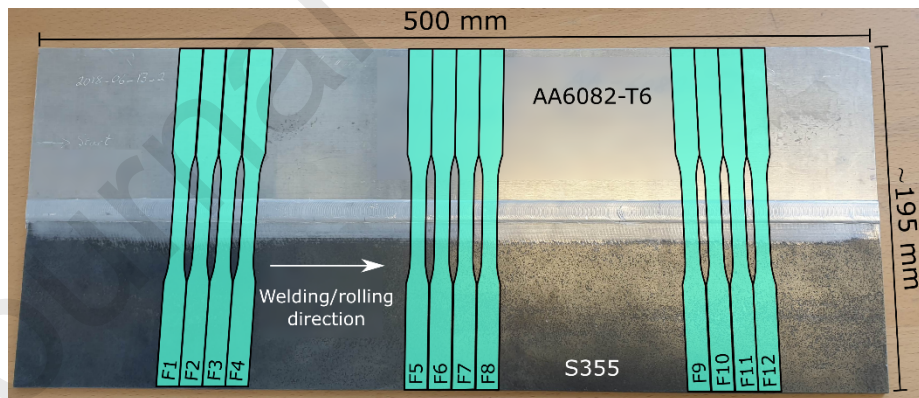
Overview of the entire third generation Al-steel HYB butt weld showing the approximate locations and correct labelling of the transverse specimens being used in the fatigue testing. The welding/base plate rolling directions and the total length/width of the butt-welded plates are also indicated in the image.
